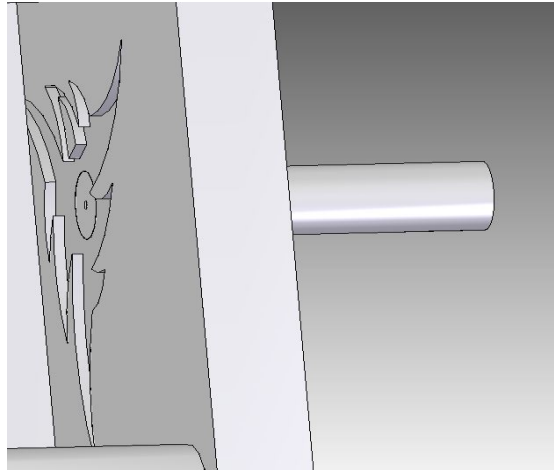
Sprue attached to the injection Mould (inside view) [Drawn by Author in Solid Edge]
